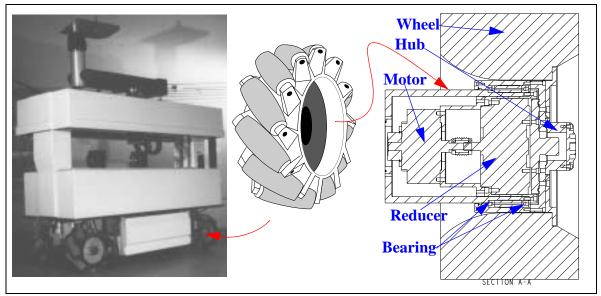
Tessellator Robot System, Meccanum-Wheel and Drivetrain X-section
